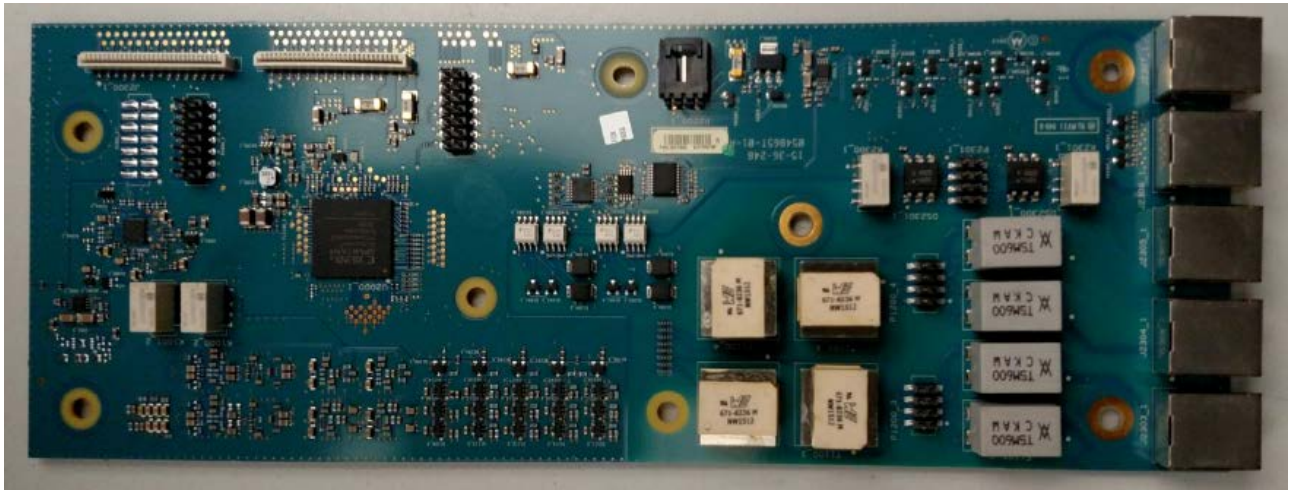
I – Internal Front View – Wireline Board Bottom View
